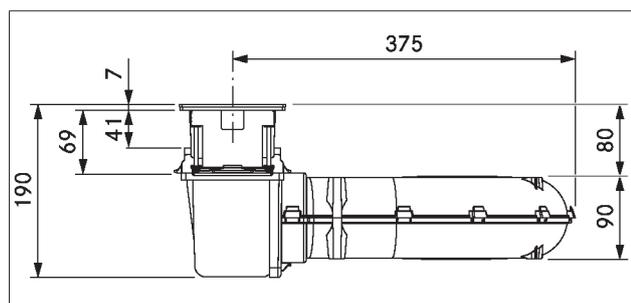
CKA2/CKA2AB appliance dimensions front view
